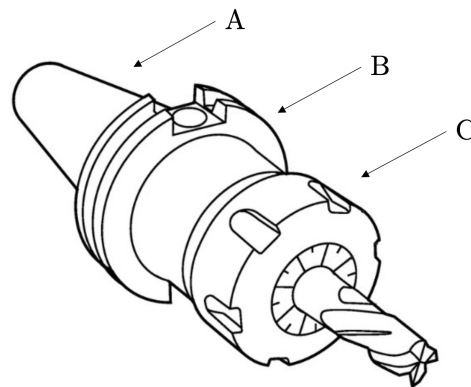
Tool holder assembly: A—cone; B—flange; C—tool fixation system.
